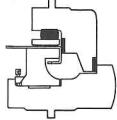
Shown is a standard wipe-down die during stroke (after forming reverse flange).
